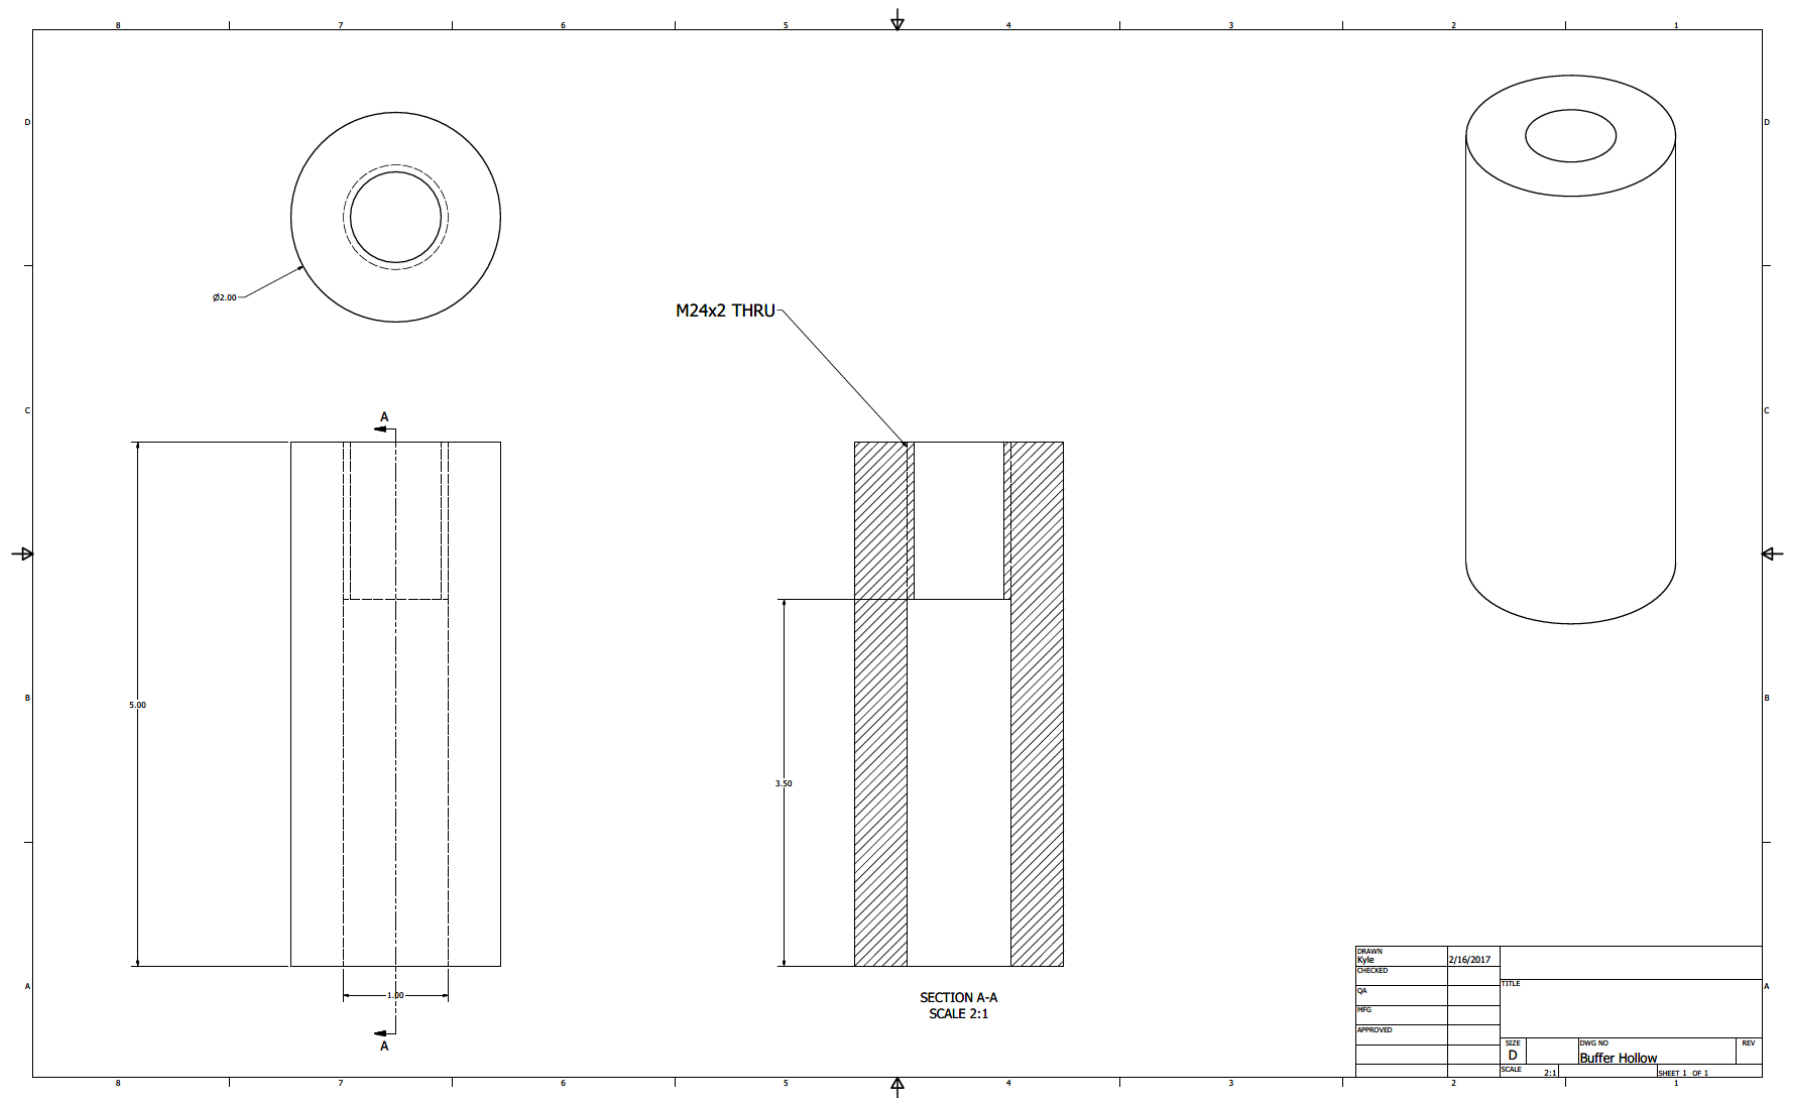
Tapped steel inserts that hold vertical adjustment threaded steel rod.
